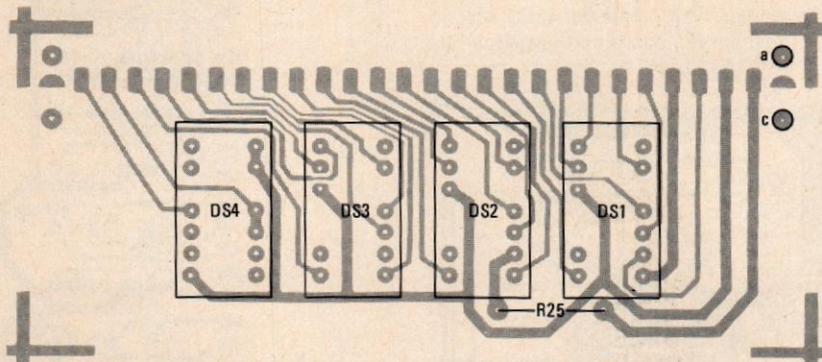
PLACEMENT OF SEVEN-SEGMENT READOUTS on the display PC board. Be sure that the readouts are right-side up and that DS4 is in correct position.
